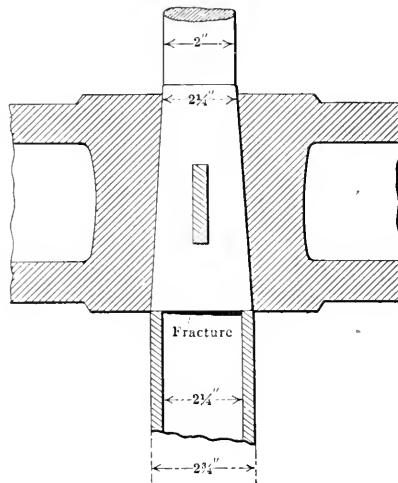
FRACTURE IN PISTON ROD OF AIR PUMP
